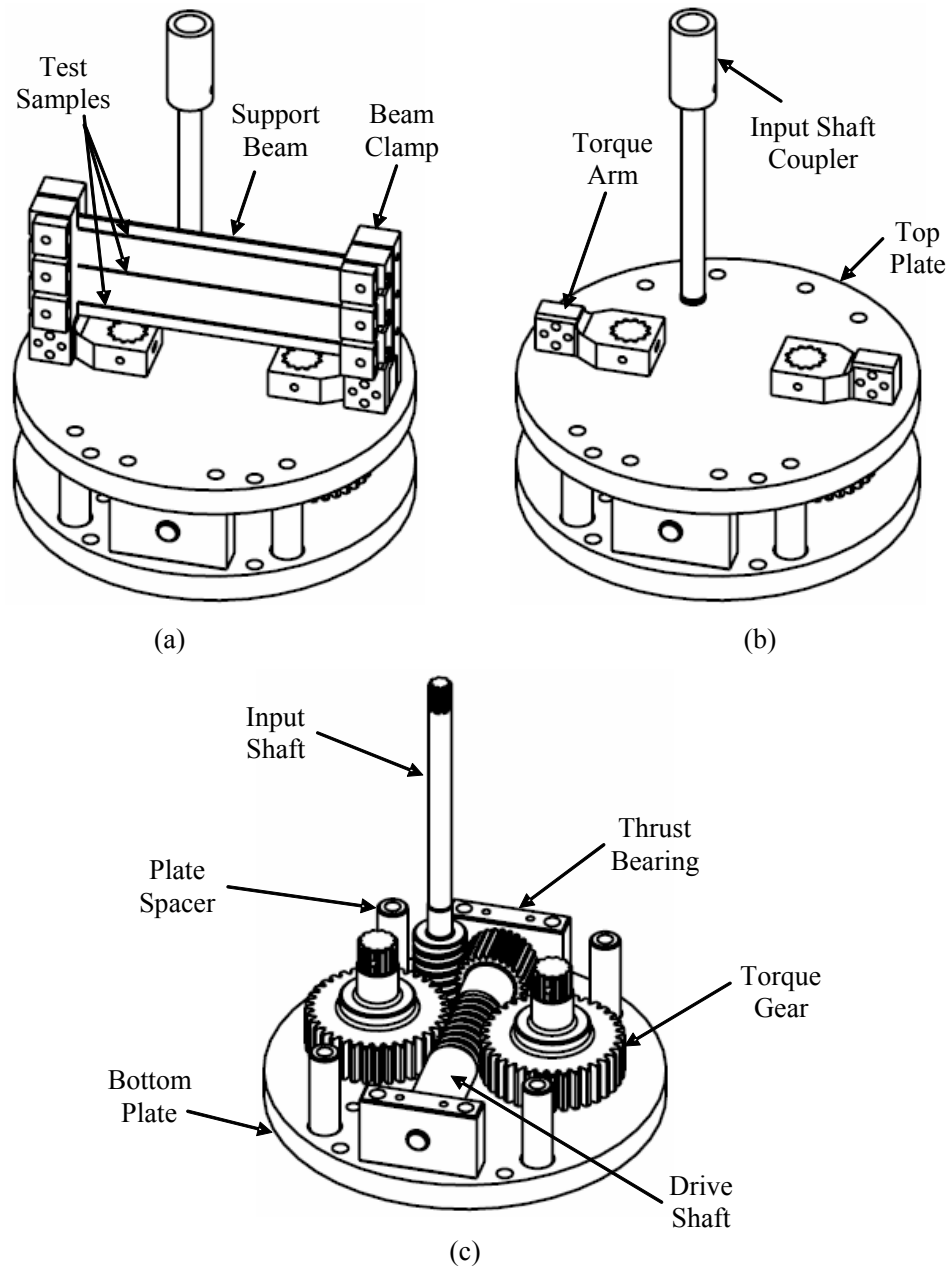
Pure bending device components: (a) complete mechanism, (b) with strand mounting system removed, and (c) inner gear train [2.23-2.24].
